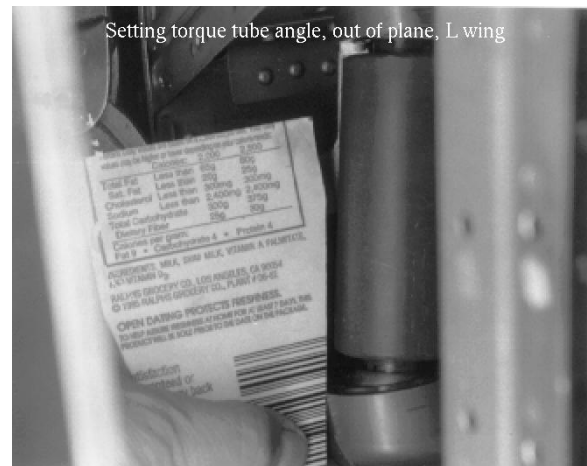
View of the torque tube in the left wing from outboard and below. The leading edge is up, so the rear bearing is at the bottom.
